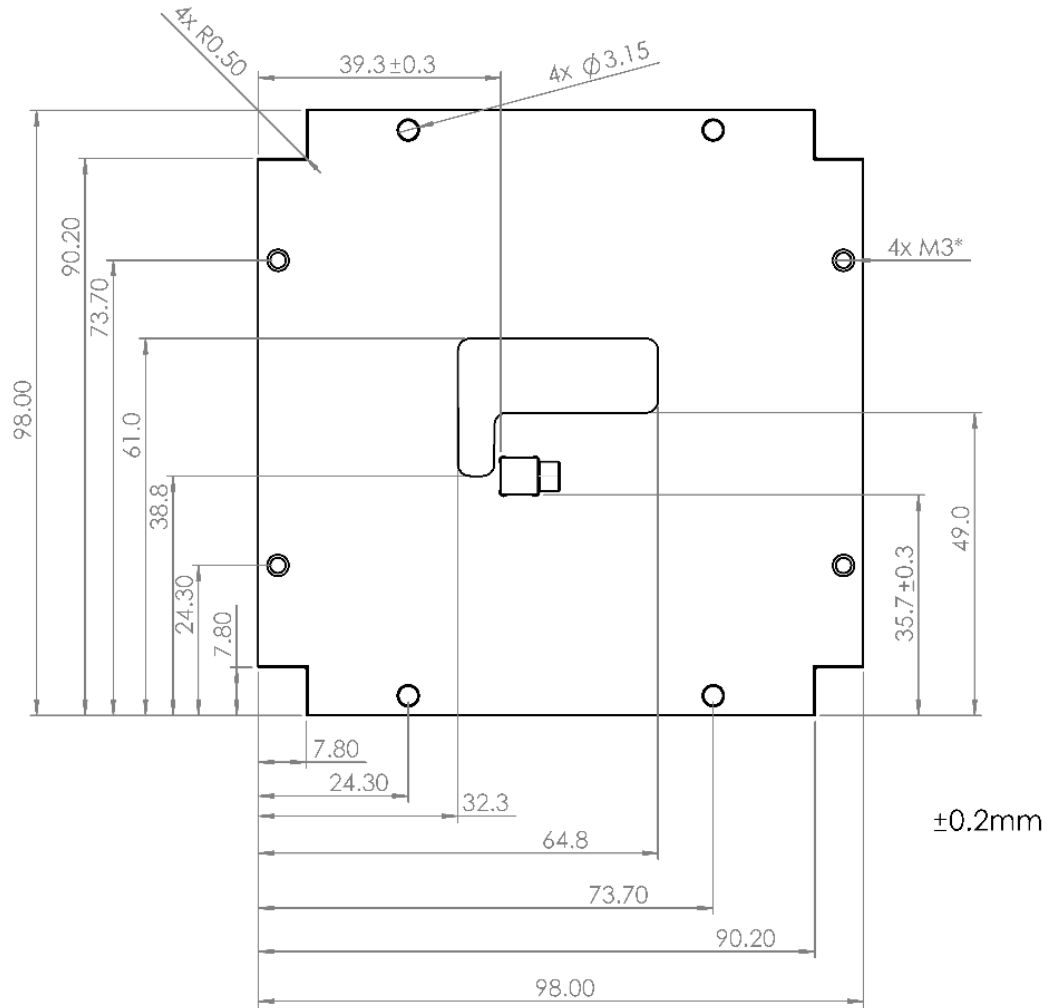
Physical Layout Bottom Side (dimensions in mm)
